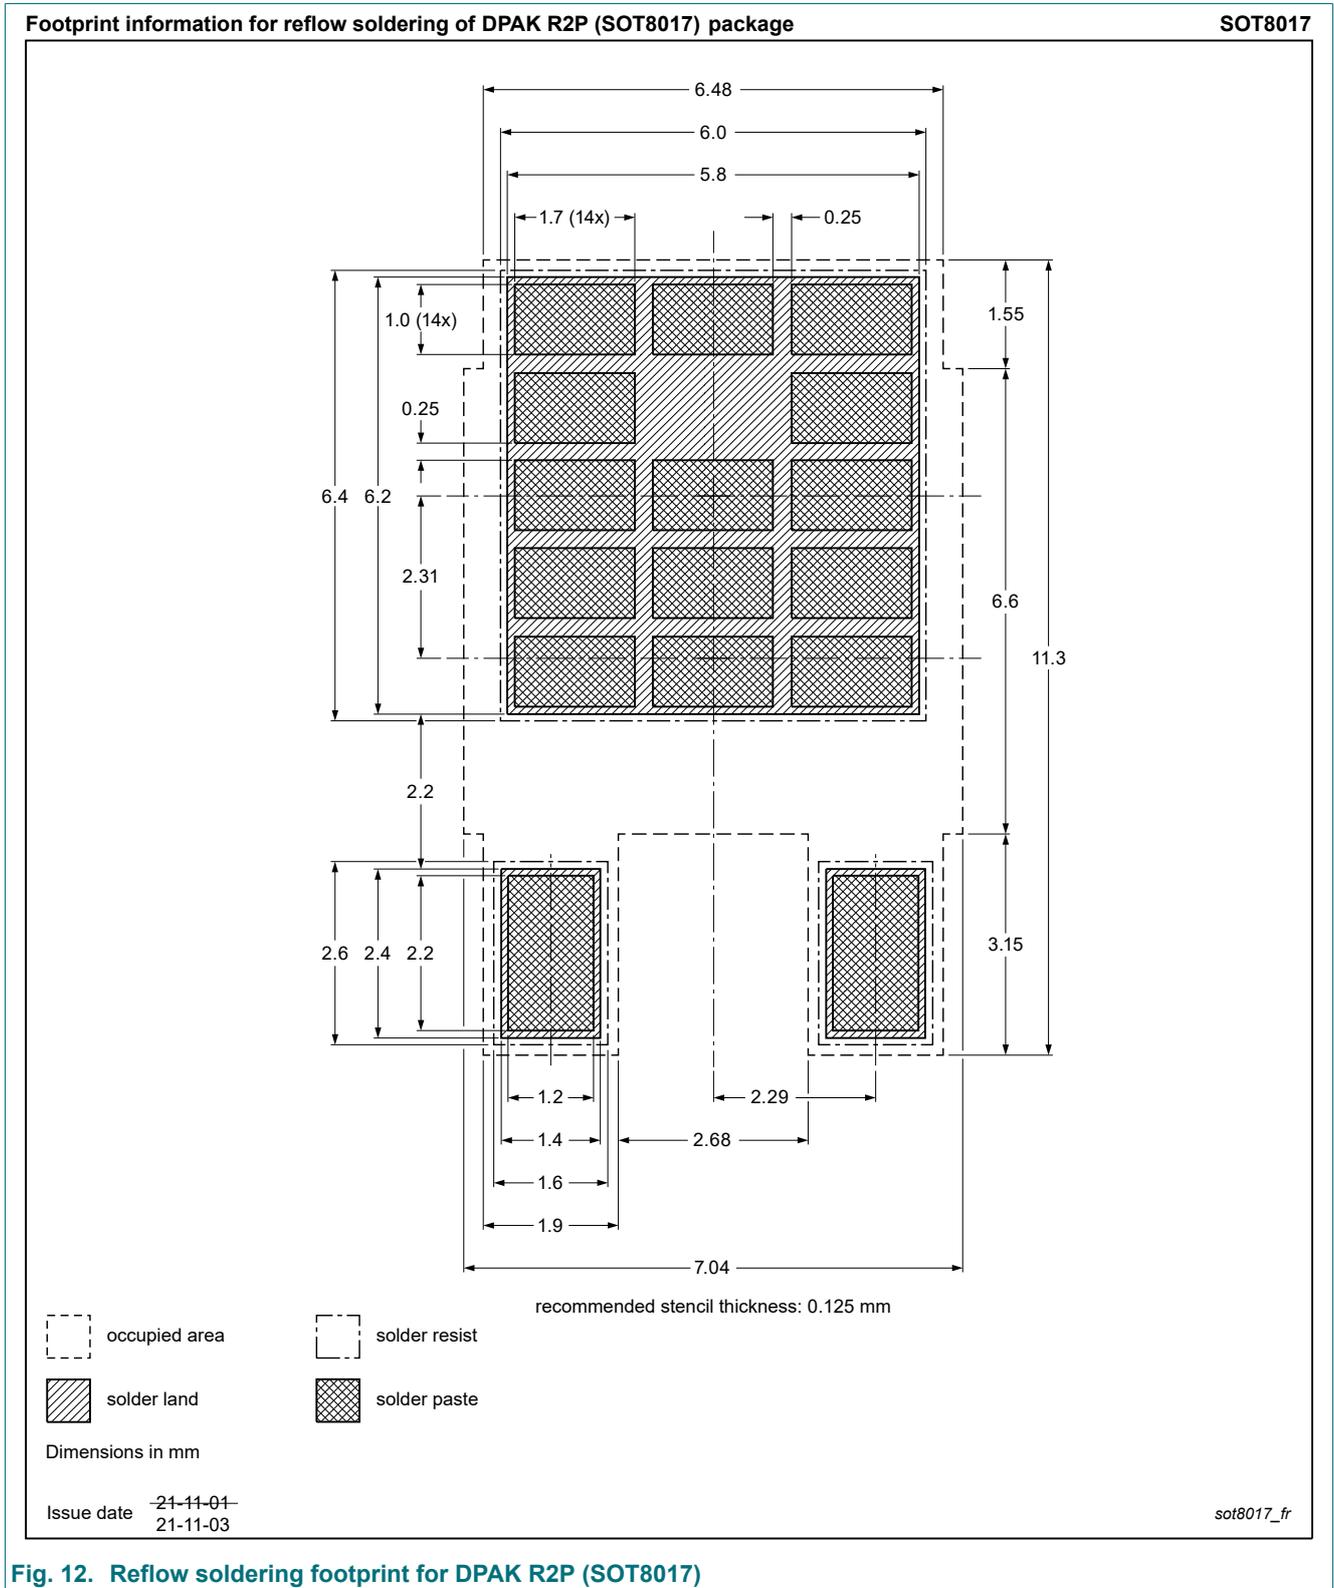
Reflow soldering footprint for DPAK R2P (SOT8017)
